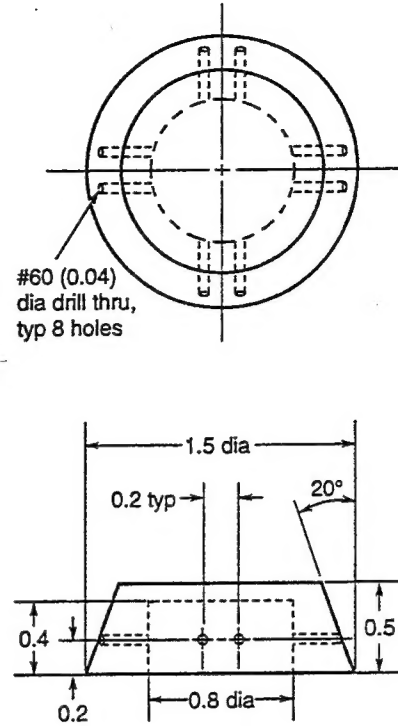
Machine drawing of the boron nitride hub that holds the probe wires at the center of the assembly (dimensions in inches). Each of the eight wires is inserted through a radial hole and secured on the inside of the hub by bending the wire into a small kink or overhand knot. The upstream face of the hub is tapered by 20° to reduce the buildup of sputtered metal from the wires.
